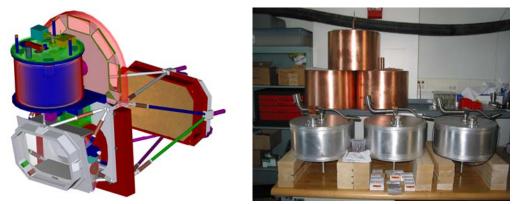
MODS CCD System. Left: Drawing of the dewar assembly and camera. Right: Dewar canister parts.
